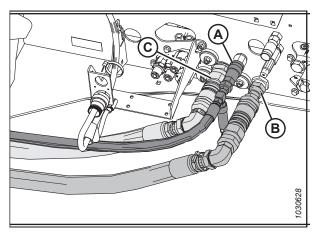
Header Drive Hydraulics – Quick Couplers
